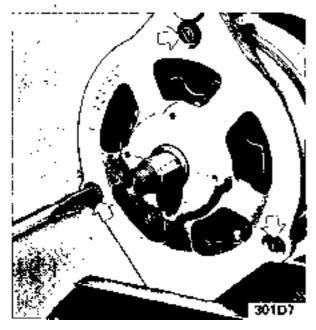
D-7 Removing Drive End Frame and Rotor Assembly
